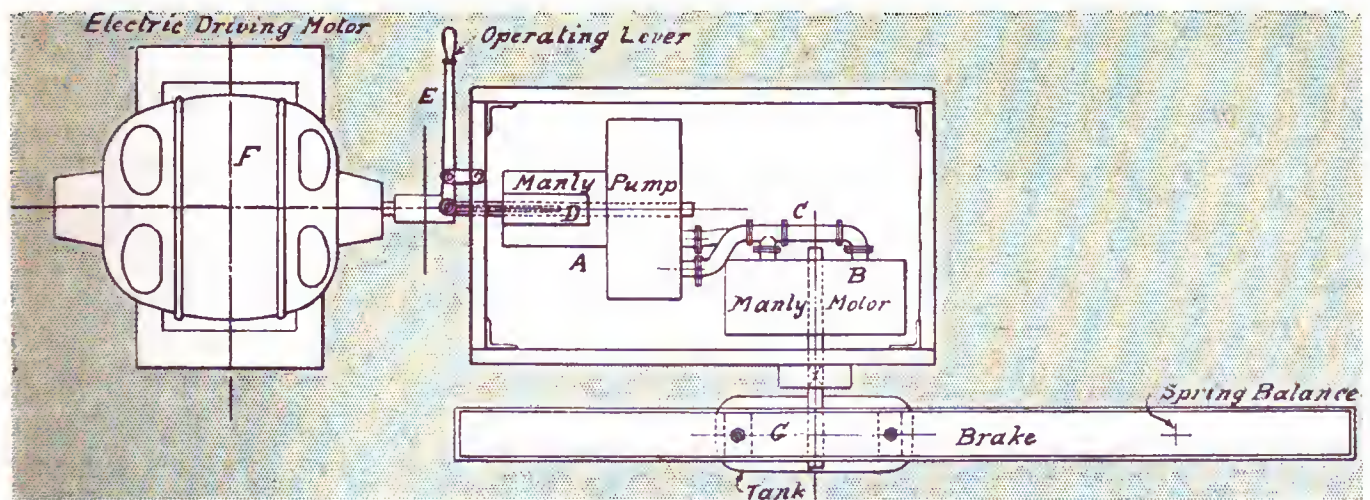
Diagram of Testing Equipment Involving Motor, Manly Drive, and Prony Brake Suitably Balanced and Calibrated.
